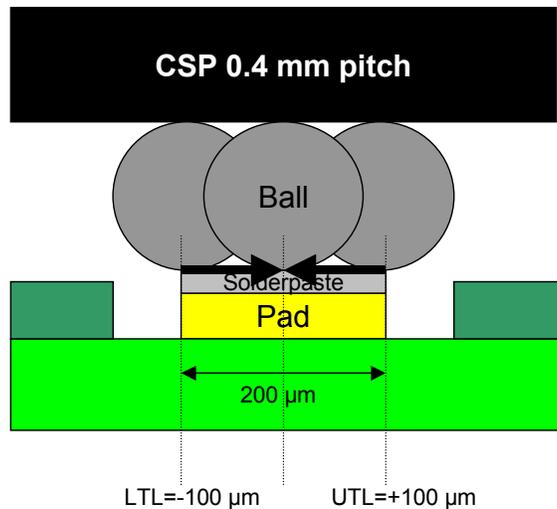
Tolerance Limits for 0.4 mm Pitch CSP and $200 \mu\text{m}$ PCB Pad Size
